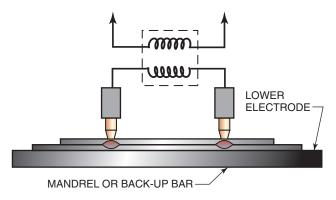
Multiple-spot welder, which is a special welder designed as an auto instrument panel welder.
